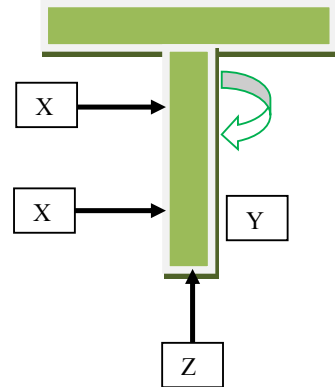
Schematic showing the capacitive sensors mounted on the machine with spindle rotating
